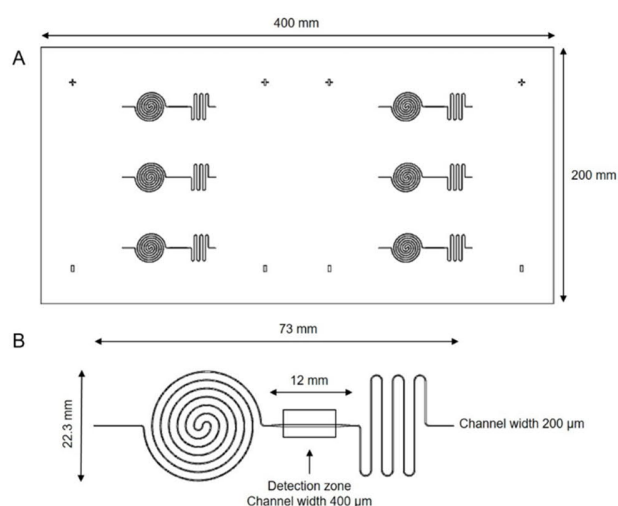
The embossing tool (A) consisted of 6 copies of the microfluidic device (B) as well as alignment marks for R2R dispenser (+ sign) and pick-and-place hybrid assembly line (□ sign).
